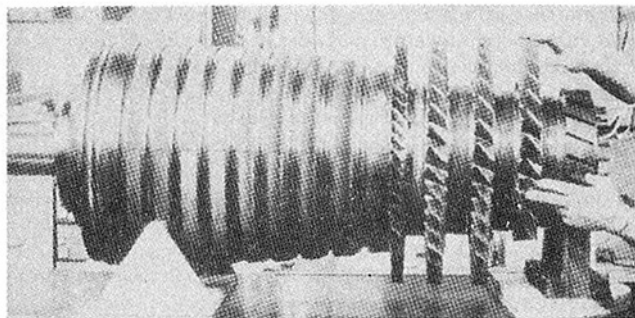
Overall view of RC-1 coated Mars 10,000 hp engine compressor rotor showing the eight stages receiving the coating
